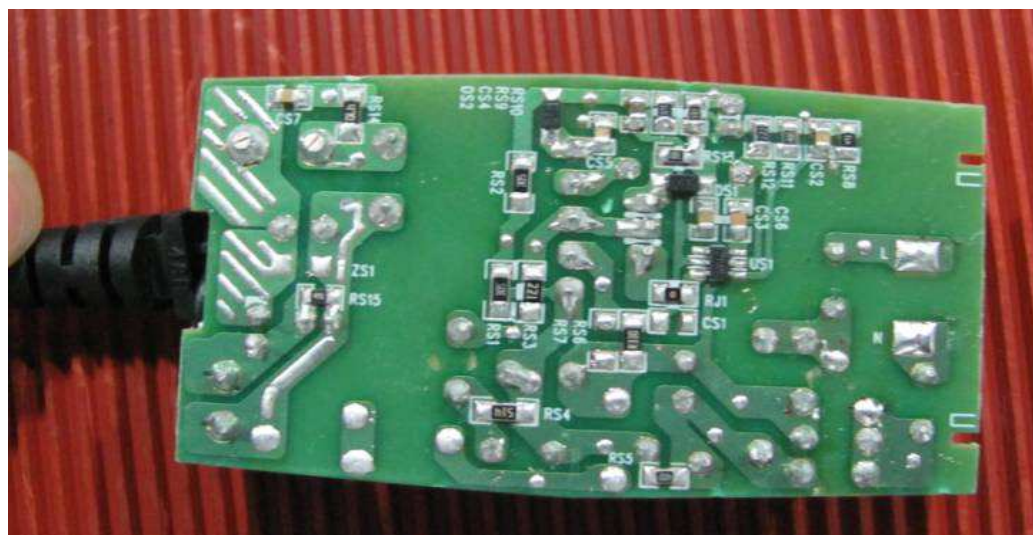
SOLDERING SIDE VIEW OF PCB OF ADAPTER MODEL GT*41134
